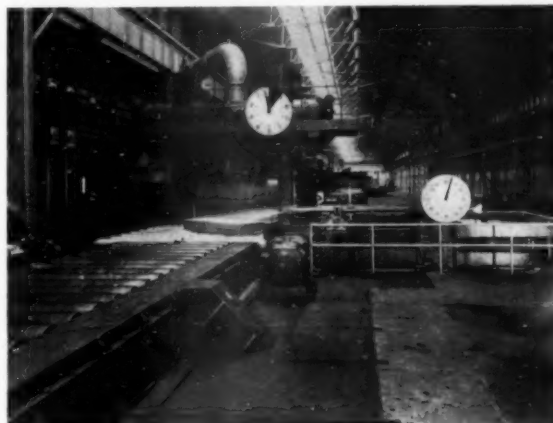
View of the No. 1 hot mill showing a slab on the turntable.
